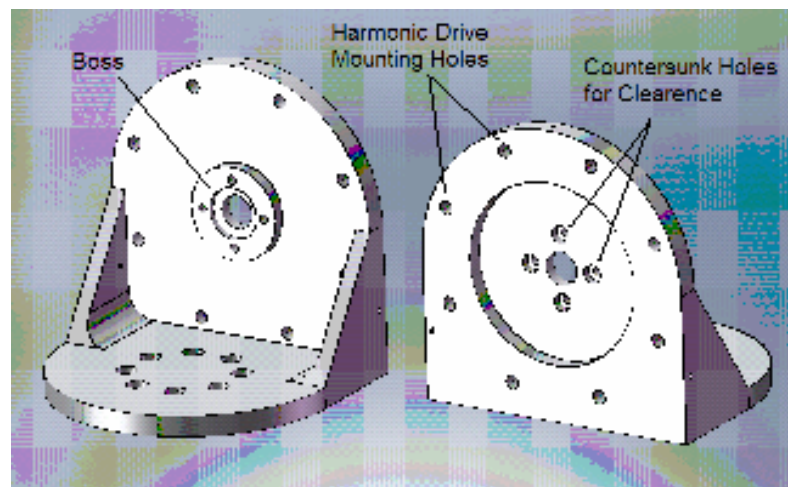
Boss and Mounting Holes for Motors and Harmonic Drives
